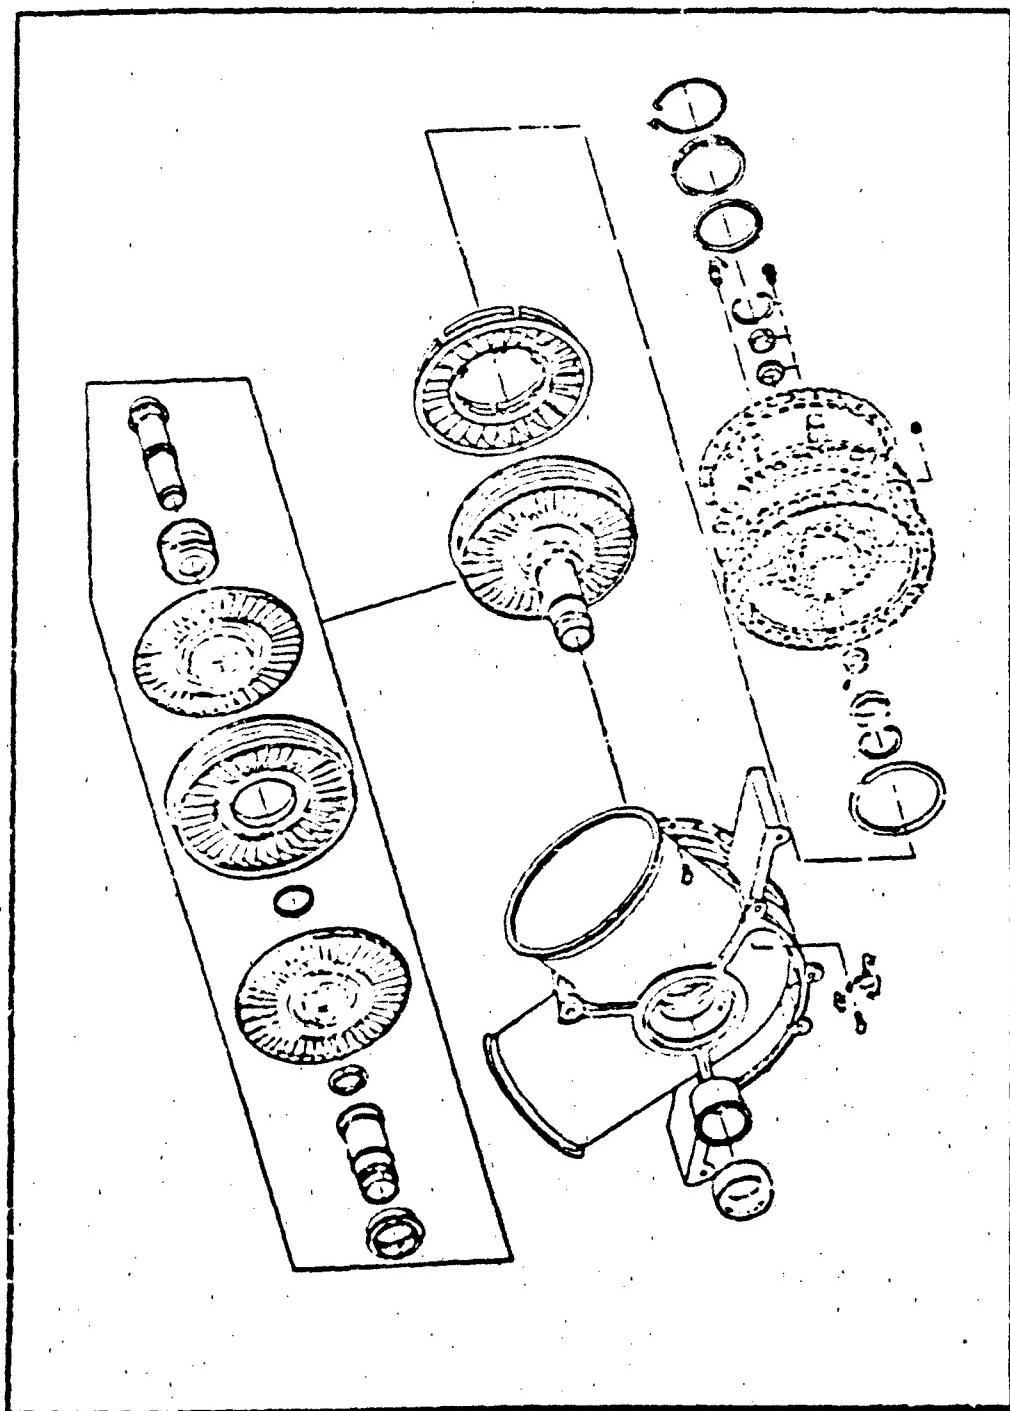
Turbine Assembly, Gas (Power Turbine Rotor and Related Parts)
